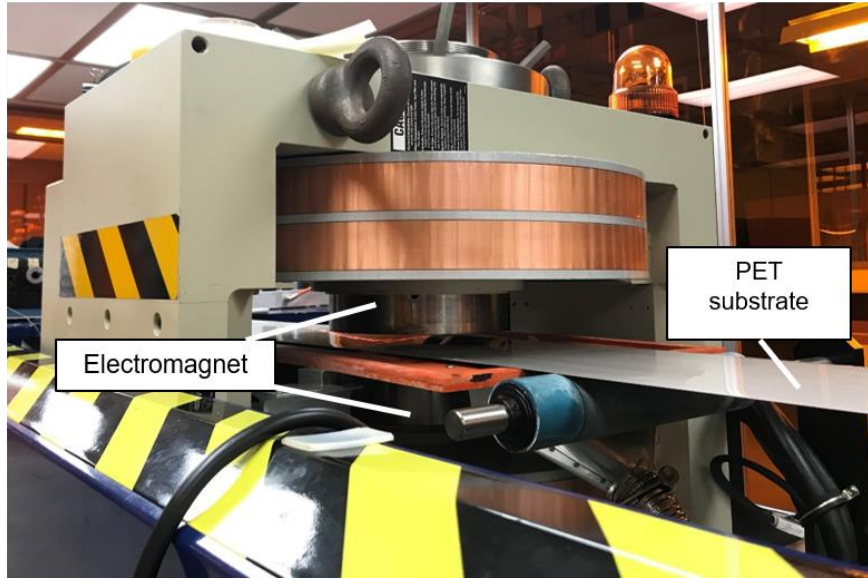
Picture of roll-to-roll machine that includes an electromagnet for “Z” alignment.
